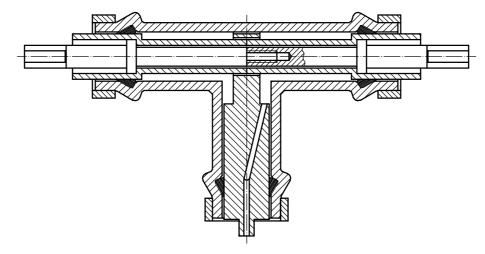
Example of pressure-tight test piece with internally pinned joints and gasket seals and without hydrostatic end thrust
